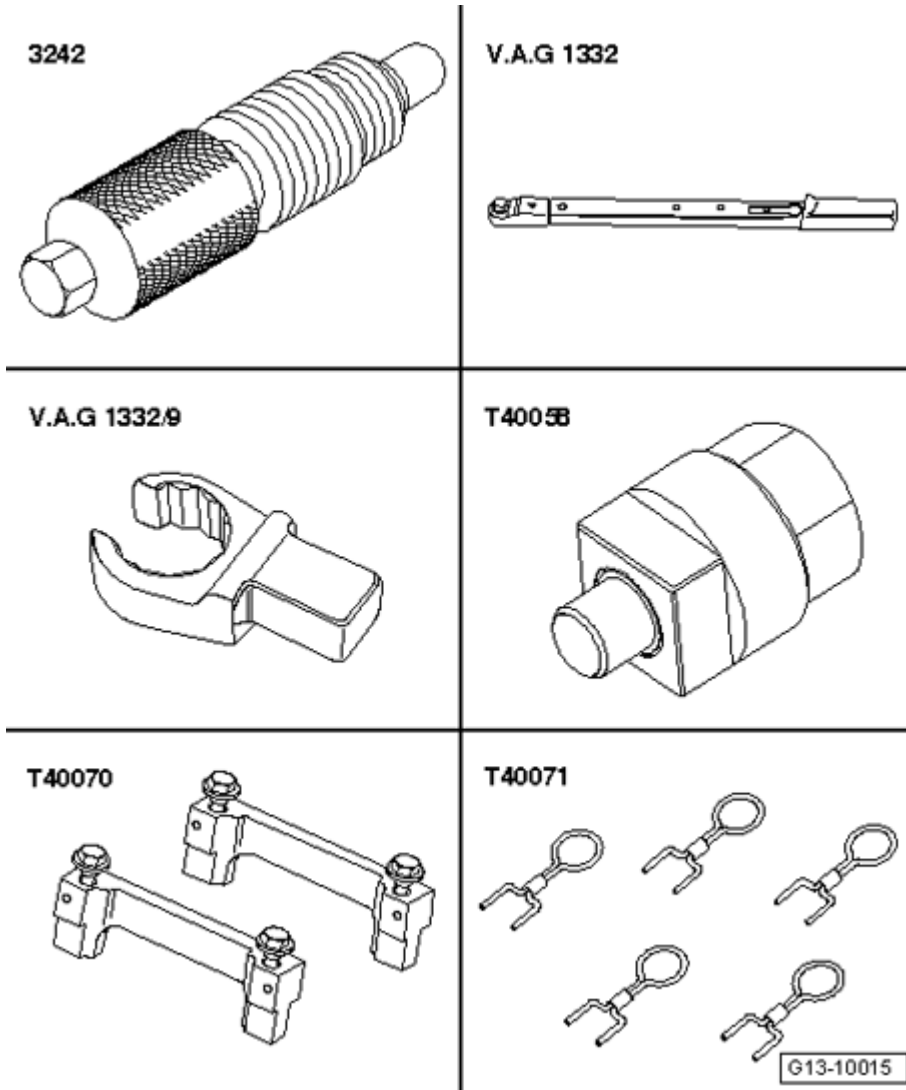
Identifying Special Tools - Camshaft Timing Chain, Removing From Camshaft
